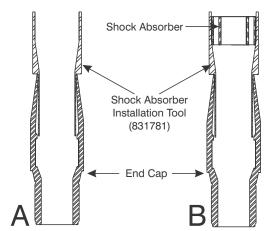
End Cap, Tool P/N 831781 and Shock Absorber
